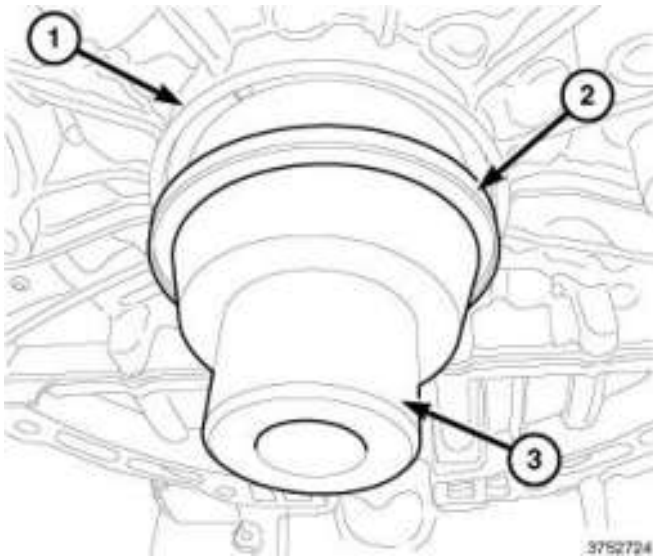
Rear Seal Guide, Rear Oil Seal & Crankshaft
